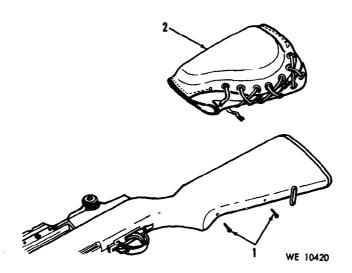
Cheek pad for rifles M1C and M1D (Sniper's) - exploded view.
